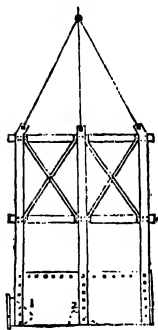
Iron Tank attached under Cage for winding water. Dotted lines, 1, show outlet valve open; and 2 show inlet valve also open.
